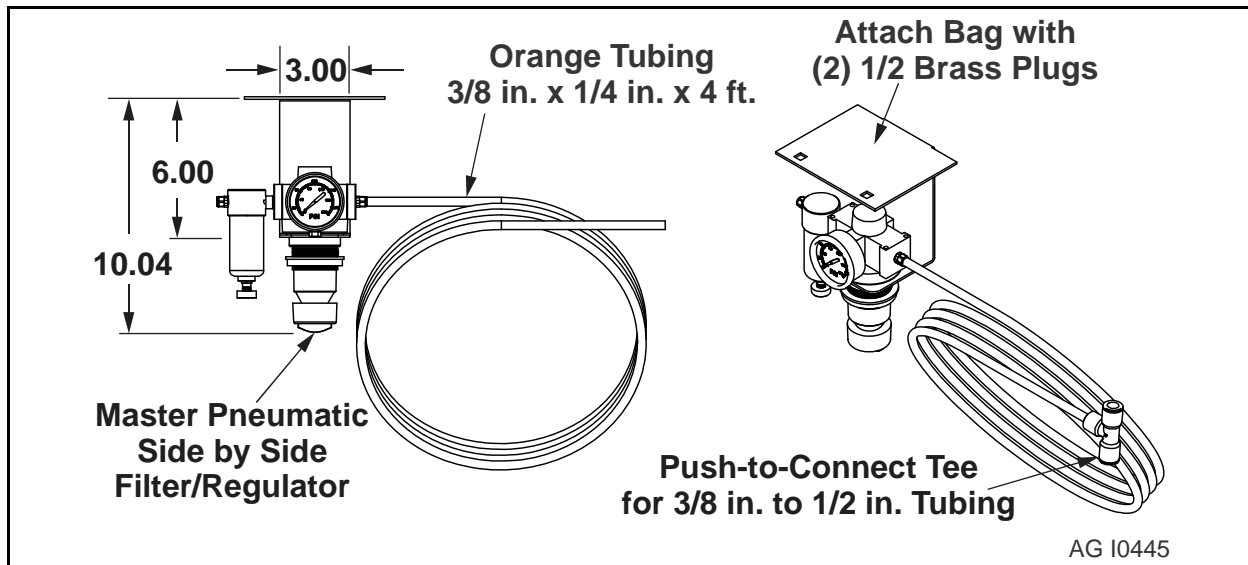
1 Air Control Assembly Kit (Filter/Regulator)
